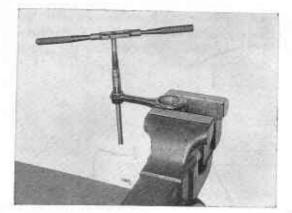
Reaming Connecting Rod Small End Bushing
